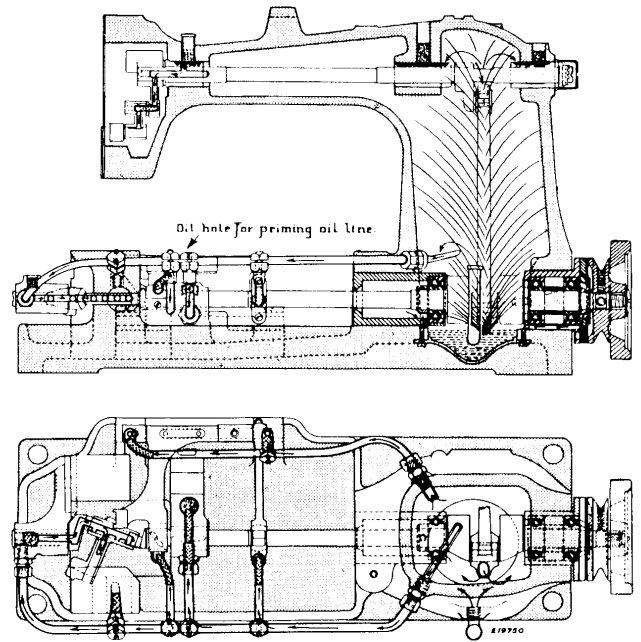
Diagrams Showing Wicks and Bearings Oiled by Automatic Splash, also Bearings Oiled by Gravity Through Tubes on Outside of Machine
